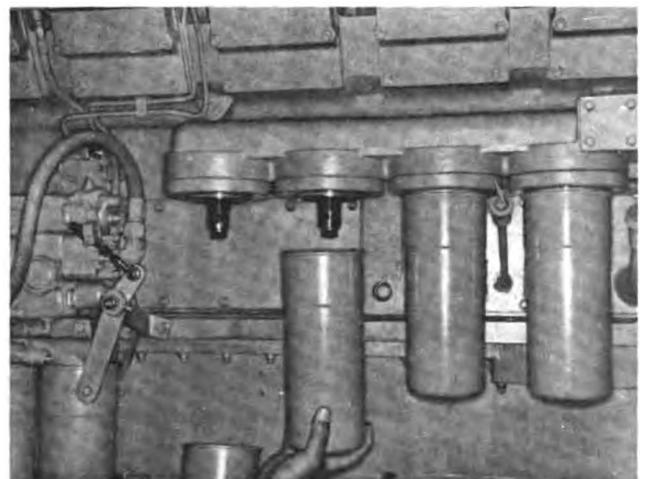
, (K21907). Installing "spin-on" lubricating oil filter — KT(A)-2300 Engine
